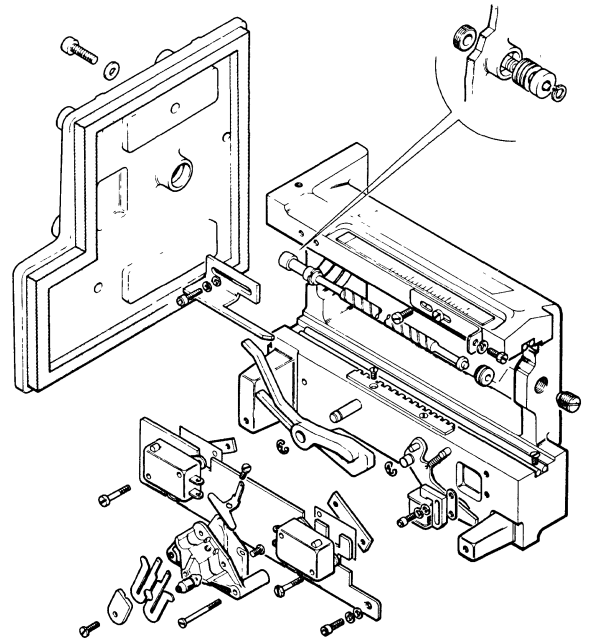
ACTUATOR ASSEMBLY (PART 2 OF 4)
